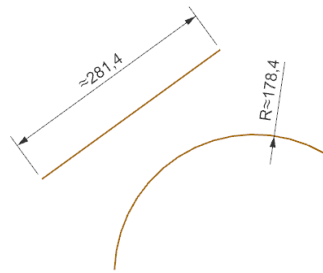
The linear and radial dimensions created by using the Rapid Dimension tool
